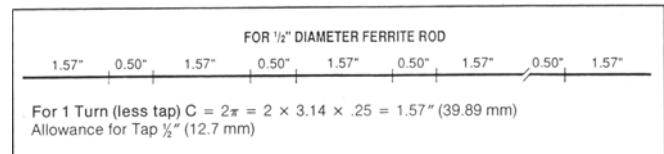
Layout dimensions for MTU tapped coil. Starting with 36 inches (91.44 cm) of wire, the finished length, after folding for taps, came out to be 30 $\frac{3}{4}$ inches (78.1 cm) for the 16-turn tapped coil. A second length of wire was cut to 30 $\frac{3}{4}$ inches for the untapped coil.
